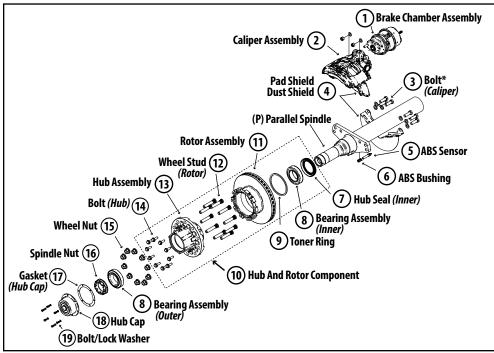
Air Disc Brake Bent-Tube Axle w/ (P) Spindle
